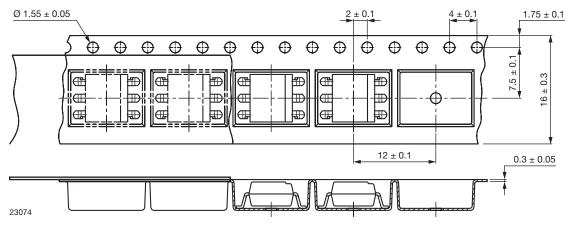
Tape and Reel Packaging (1000 pieces on reel)
